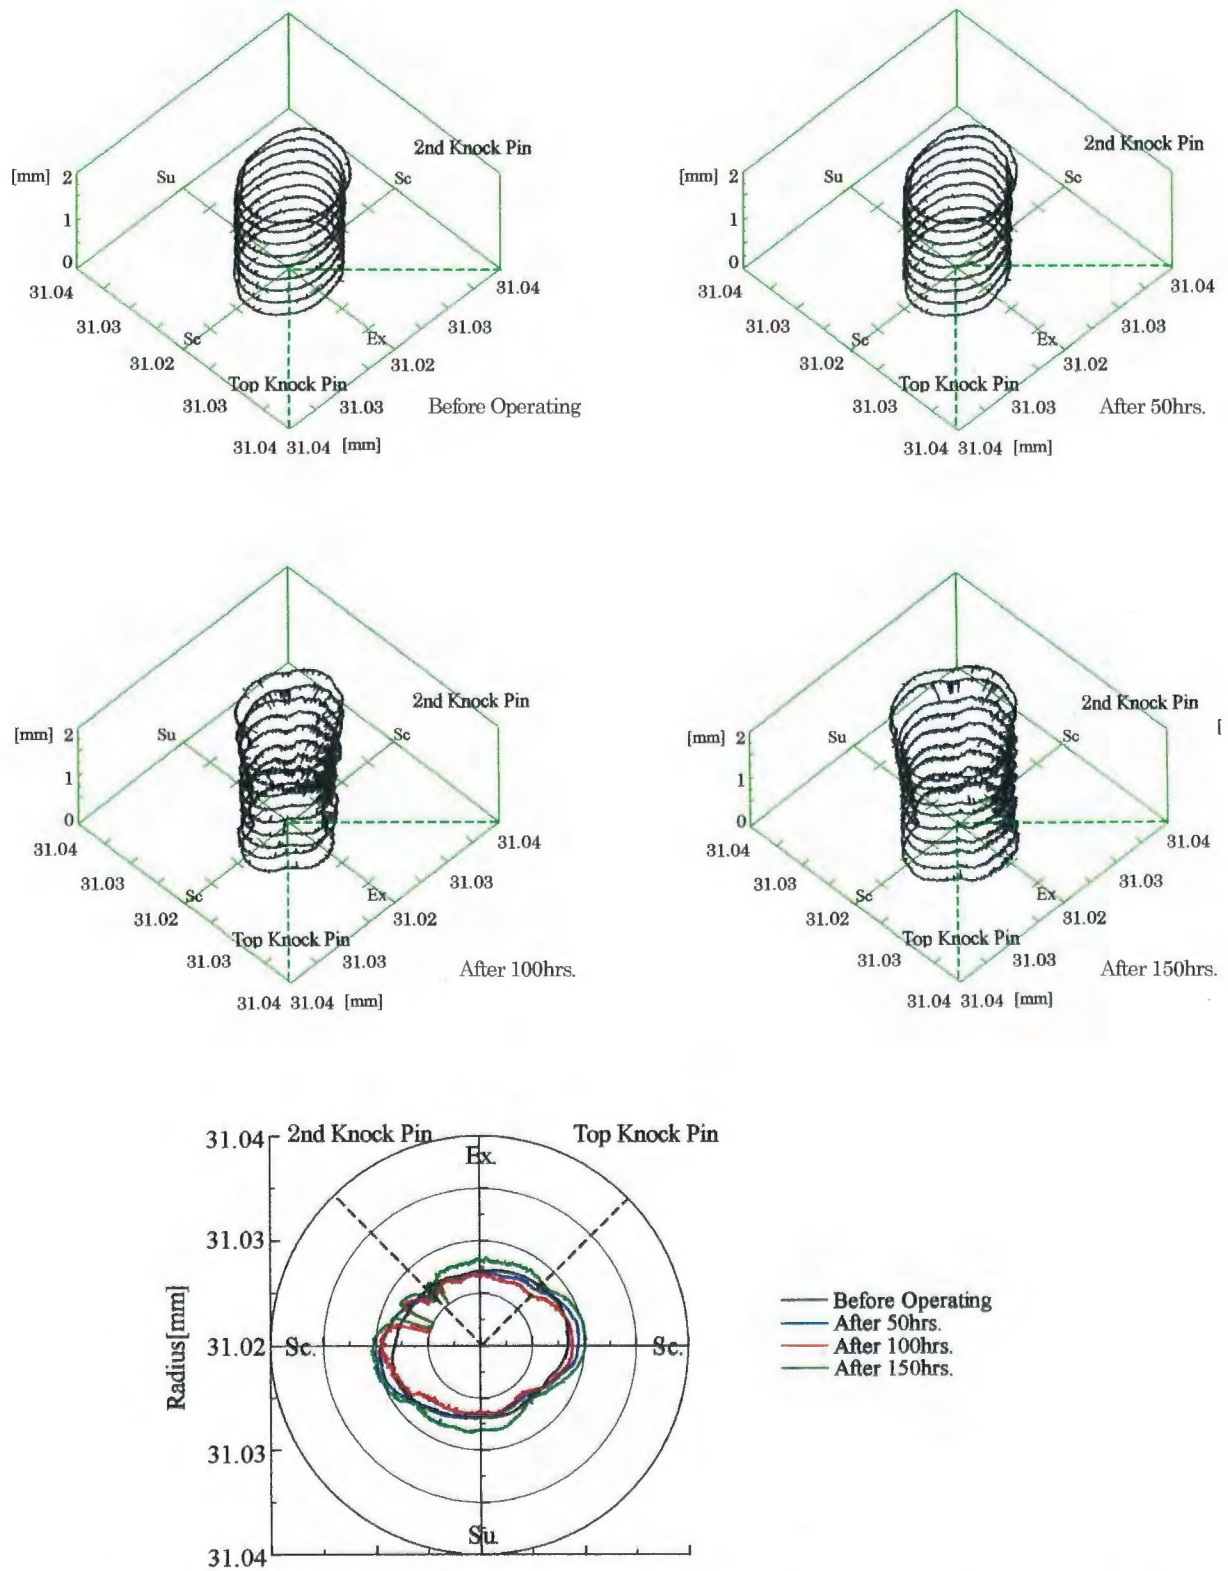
(a) The three dimensional and plane form of cylinder G2(RND1)
